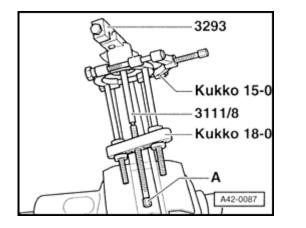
Attaching 3293 lower control arm assembly device to lower control arm
